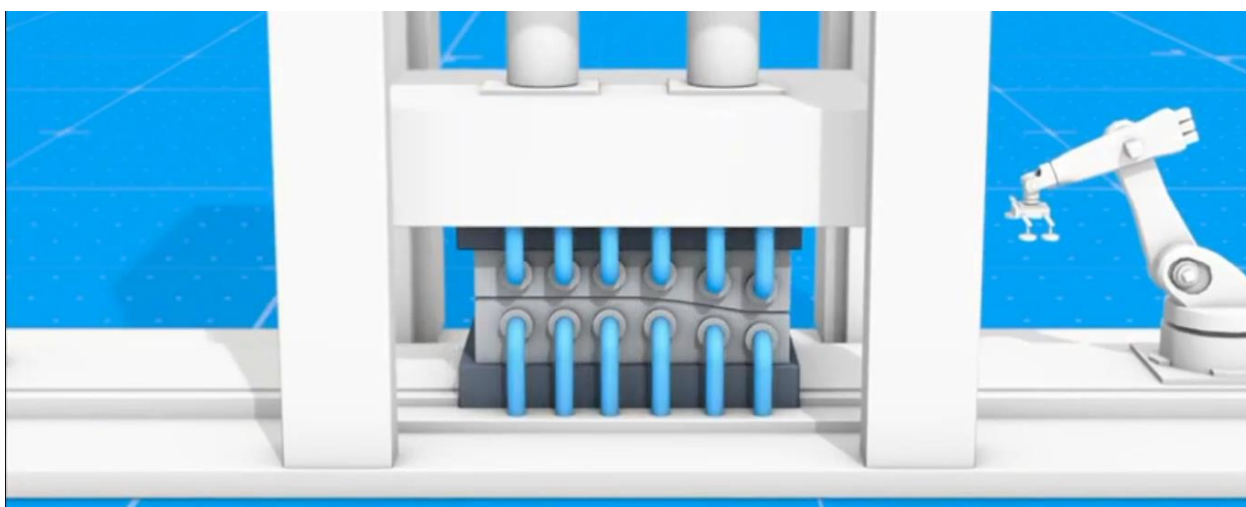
At the end of the forming process, the component is rapidly cooled in the chilled tool.
